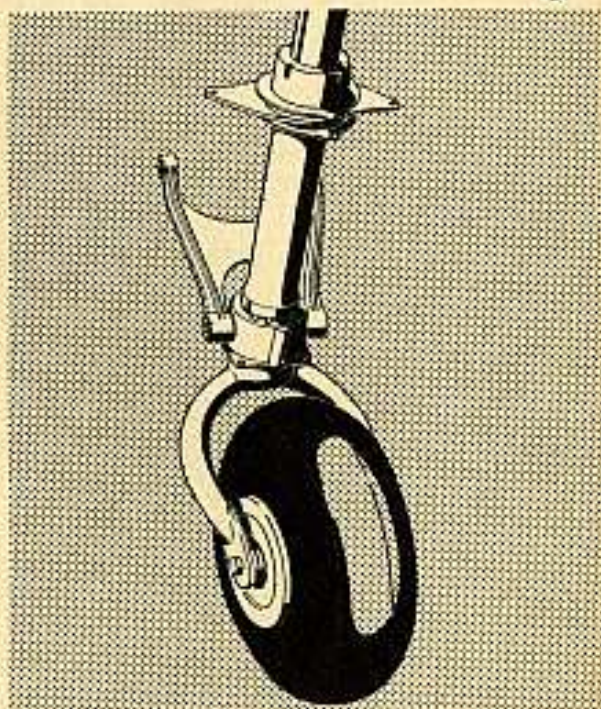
Collar bearings must be checked for wear and galling, so disassemble strut to clean and lube 'em. It's safer that way.
